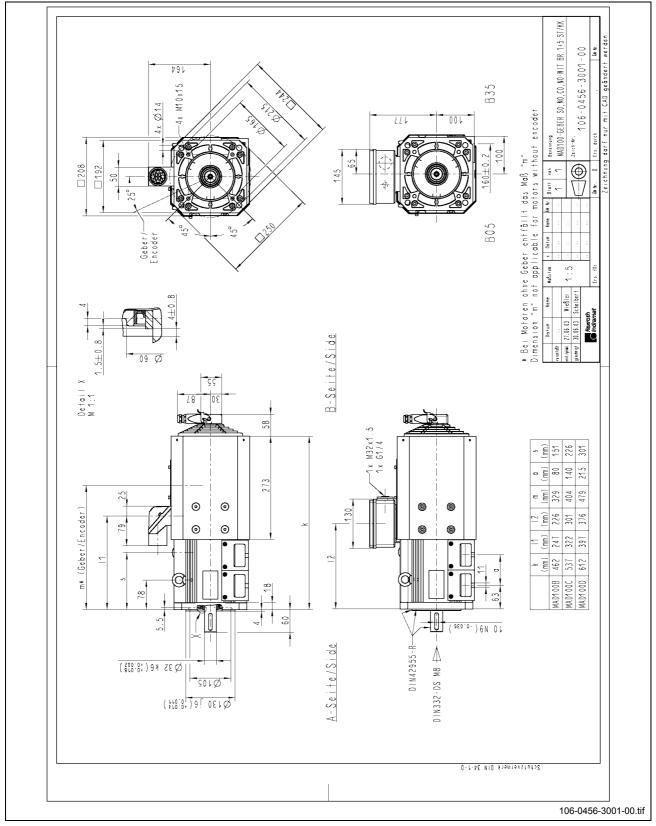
Dimension sheet for MAD100, with brakes 1 and 5
